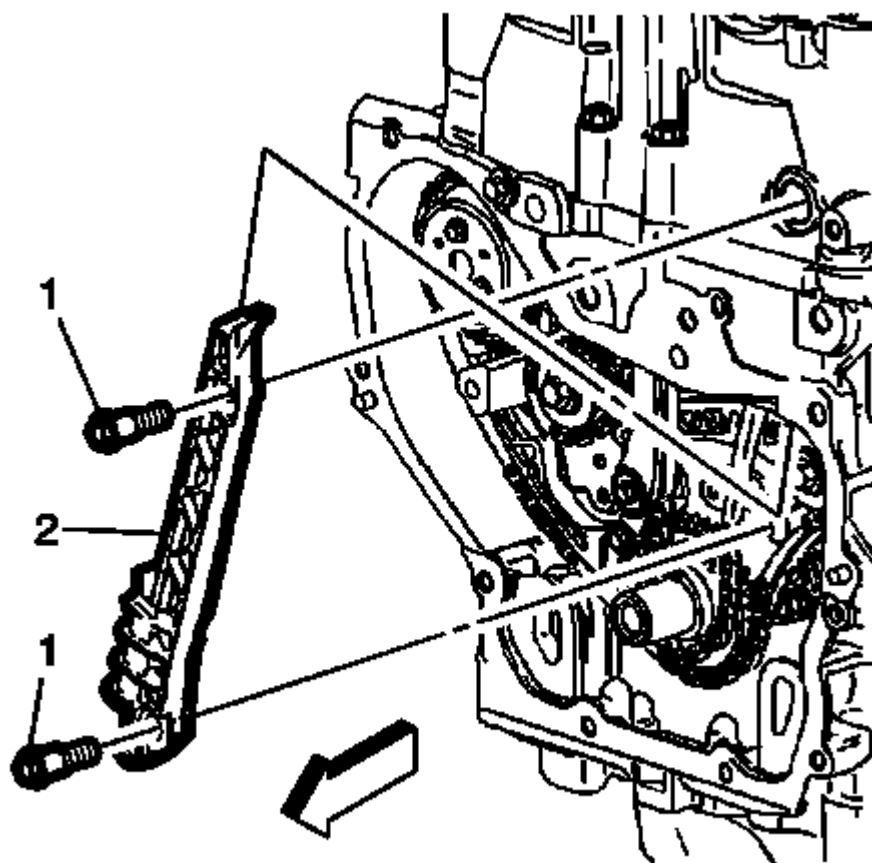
Fixed Timing Chain Guide Bolts And Guide
